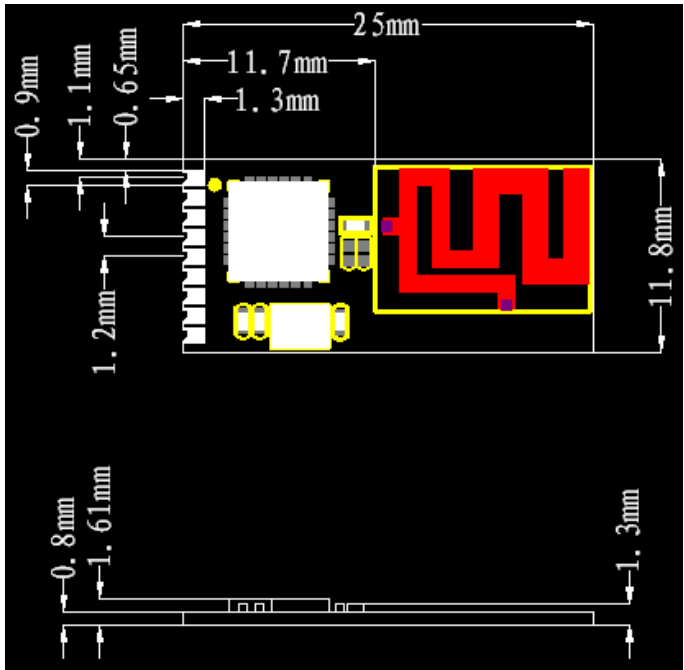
RECOMMENDED PCB FOOTPRINT
